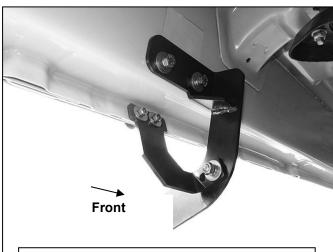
Attach Driver/Left front Support Bracket to front facing side of Mounting Bracket
